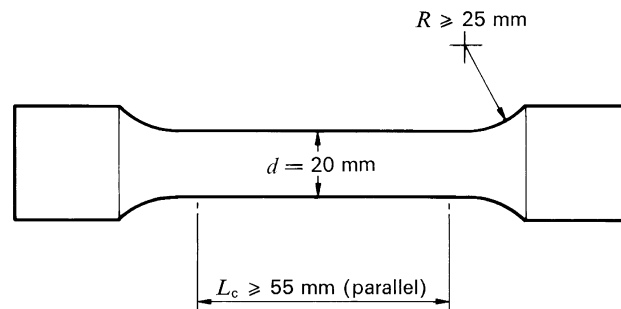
Test specimen dimensions for grey iron castings - II
